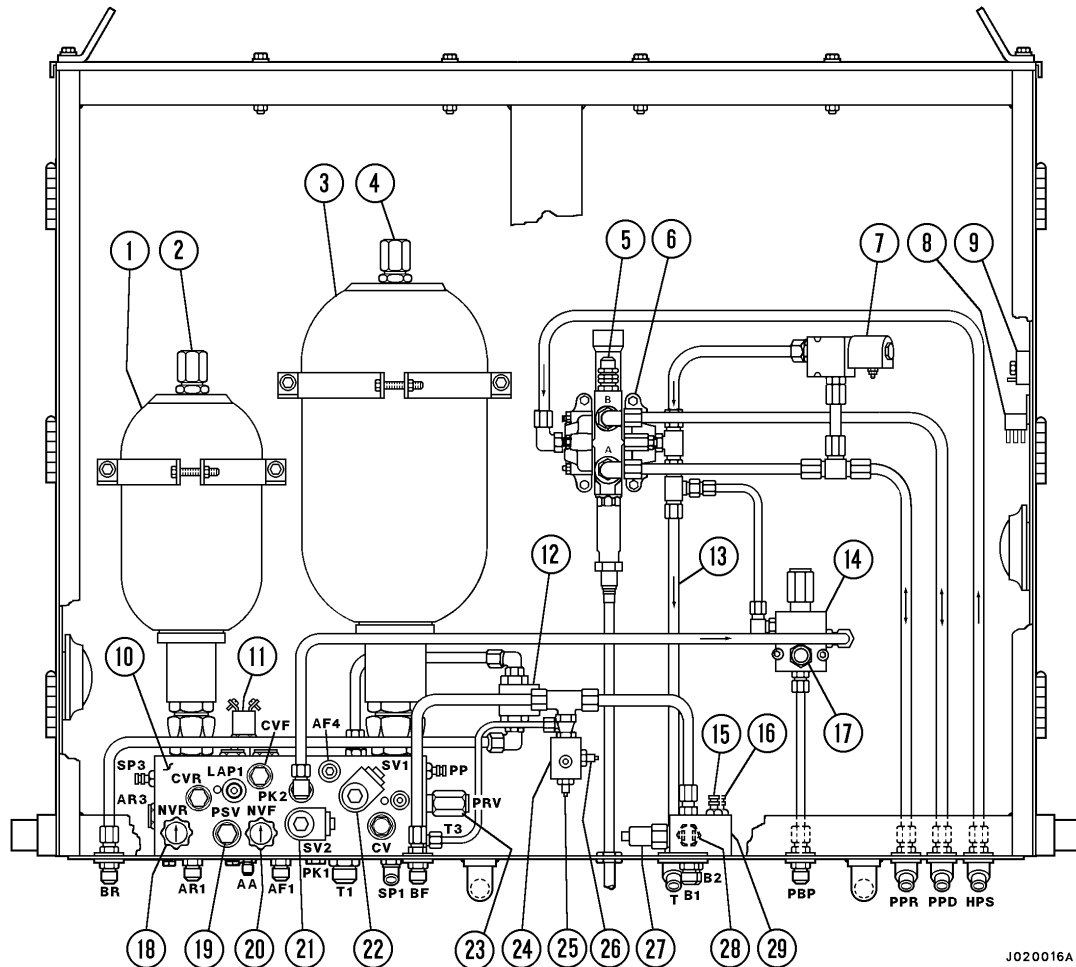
HYDRAULIC BRAKE CABINET
